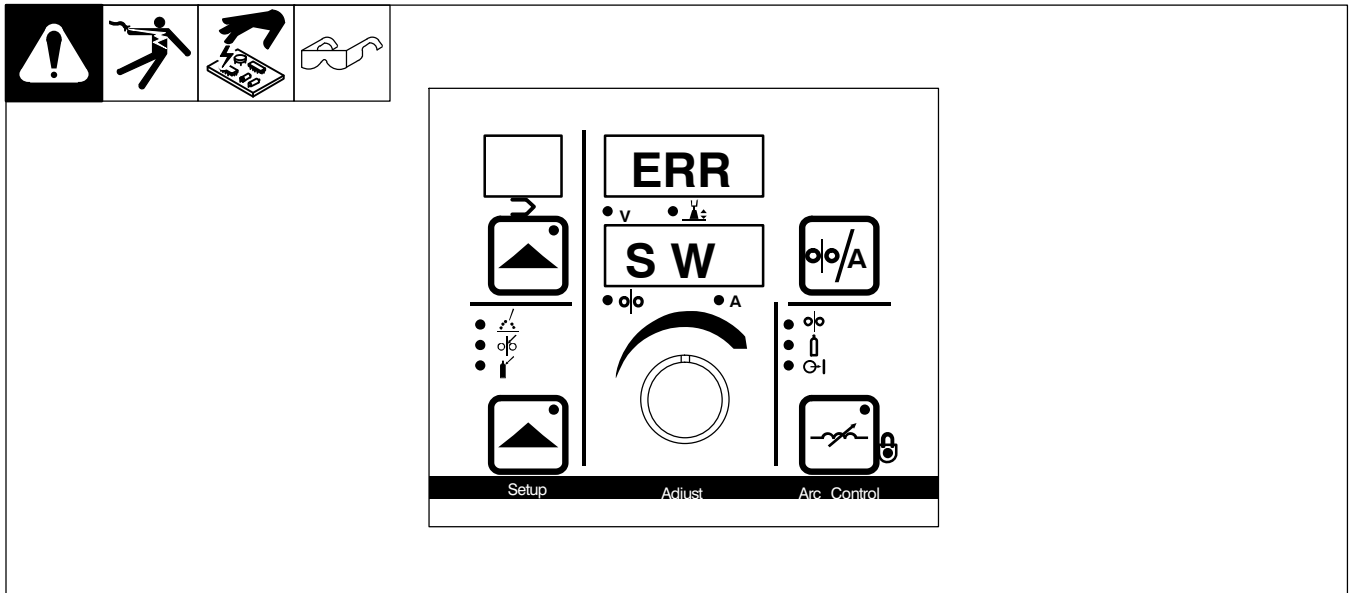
3. Welding Power Source Display For Software Version Issues
